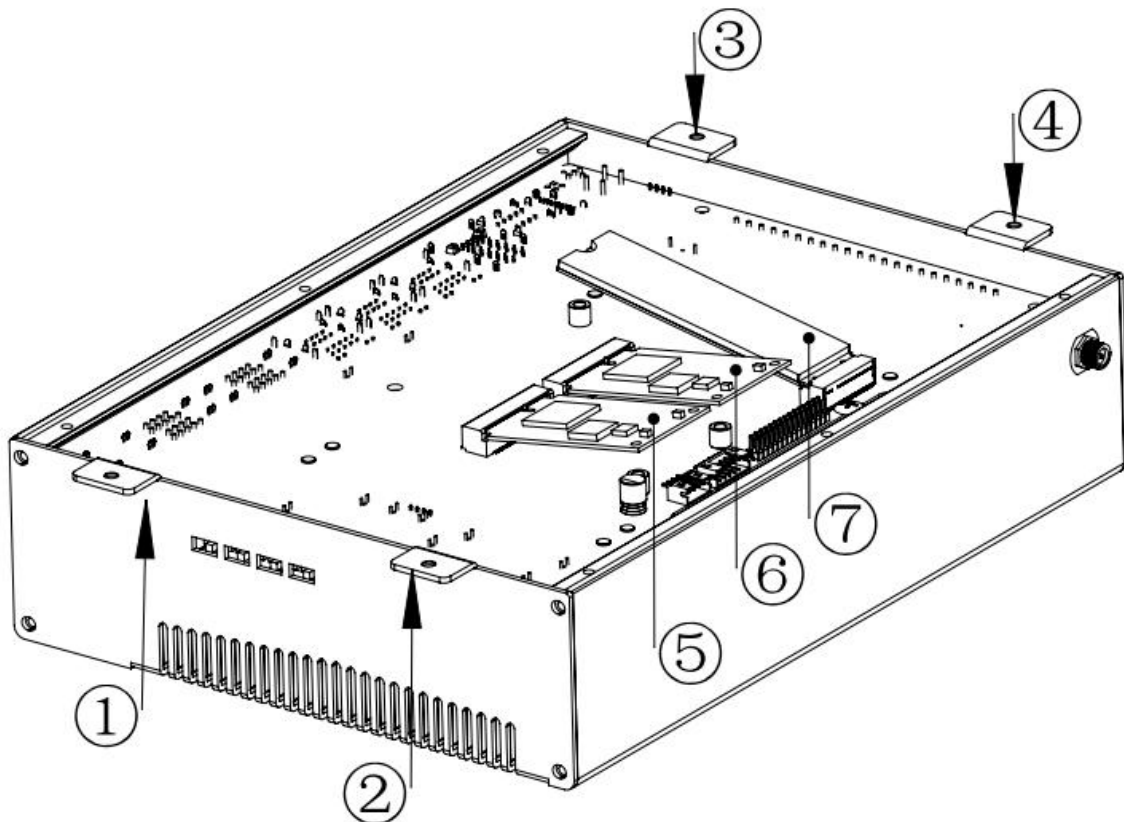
1 TPC6000-XXX4 miniPCIE expansion card installation
